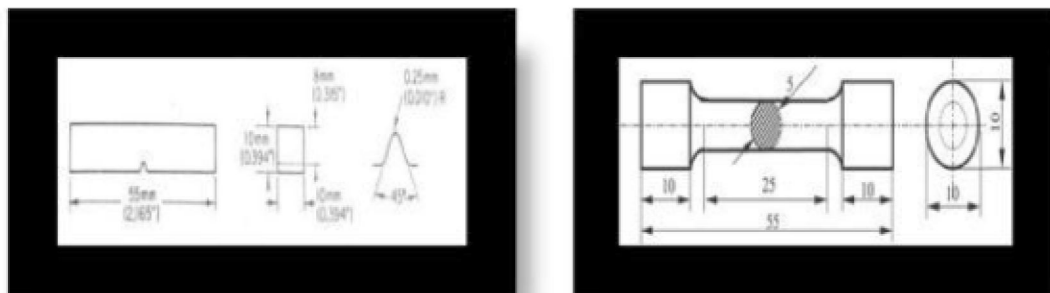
(a) Dimensions for Charpy test sample (b) Dimensions for UTS test sample
